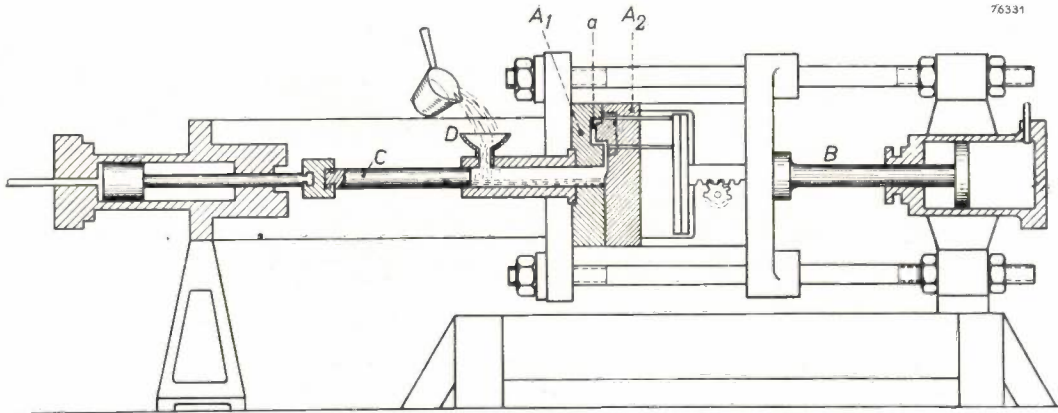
Machine for pressure die casting. A_1 and A_2 are the two parts of the steel die. The moving part is pressed against the fixed part by the hydraulically moved piston B , while the piston C forces the liquid metal, poured into funnel D , into the cavity a of the die. (From "Designing for Alcoa die castings", Alum. Co. of Amer. Pittsburgh 1948.)
